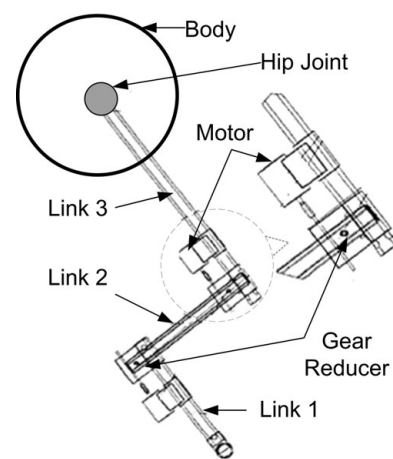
Three-link Uniped design details (adapted<sup>29</sup>).
